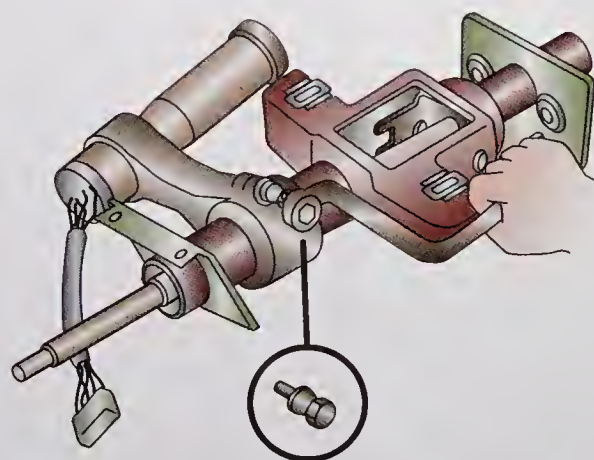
Tightening tapered-head bolts in upper bracket.
